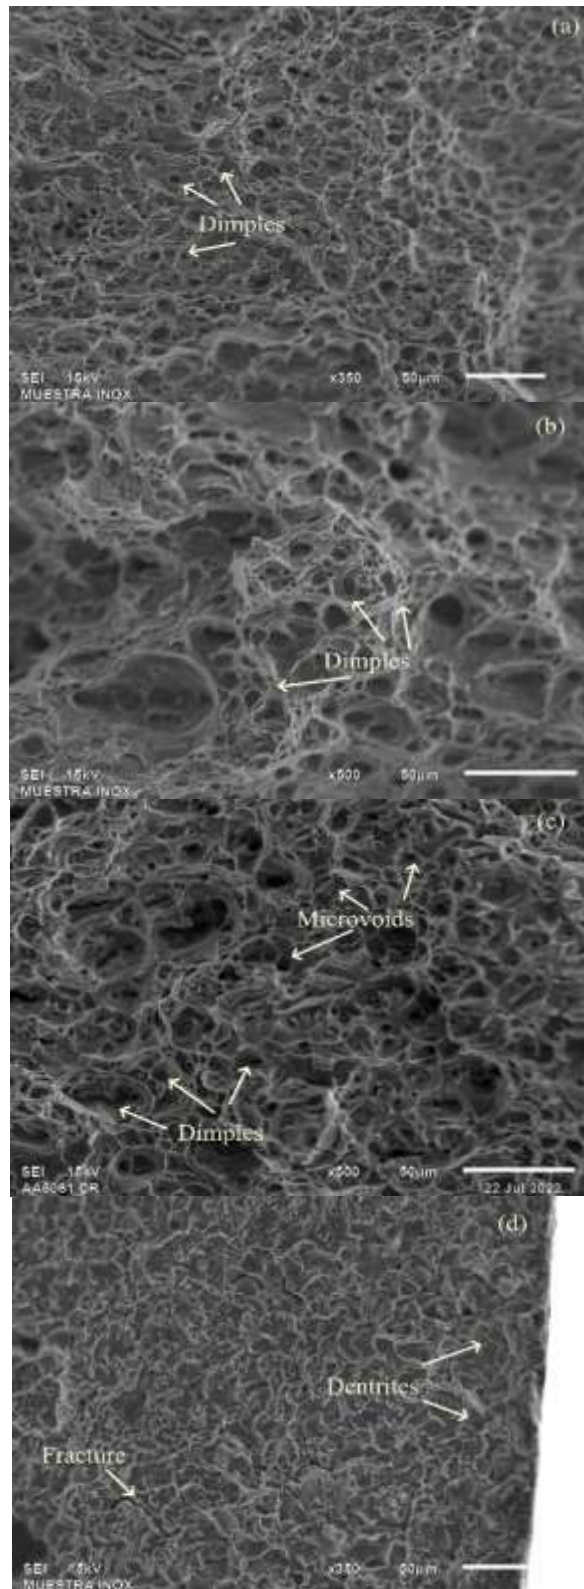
Examples of the fracture patterns of the room temperature tensile tested samples: (a) base metal, (b) “As welded” sample, (c) CT sample, and (d) HT sample.
